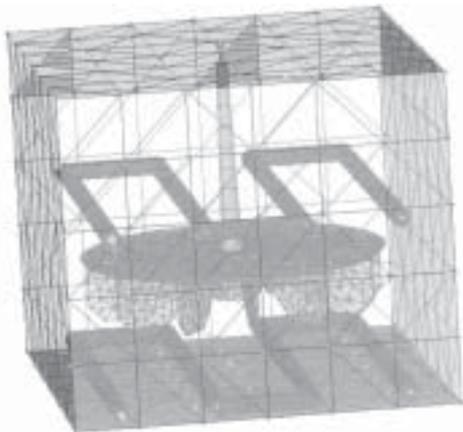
The discretisation mesh of the "Ventilator" and a cooling channels incorporated into the mould surface wizard
